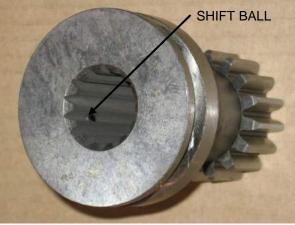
MOTOR SHIFT GEAR ASSEMBLY
